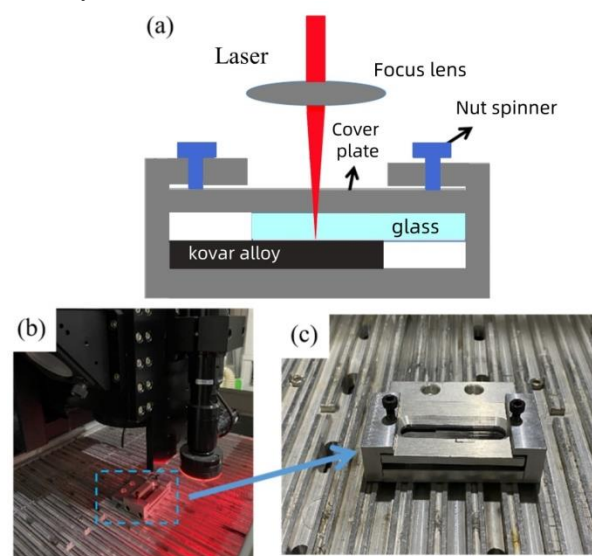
Schematic diagram of the picture shown the welding: schematic diagram of laser welding with a clamp, (b)real welding photo and (c)its real clamp (drawings not to scale)
